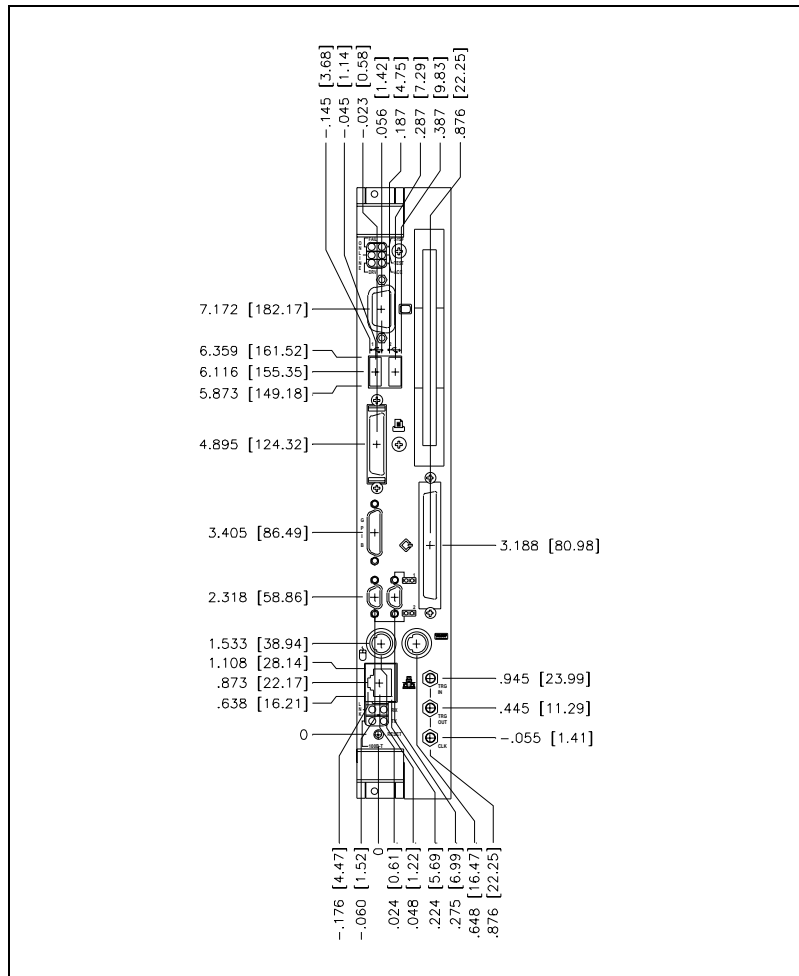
VXIpc-650 Front Panel Layout and Dimensions
